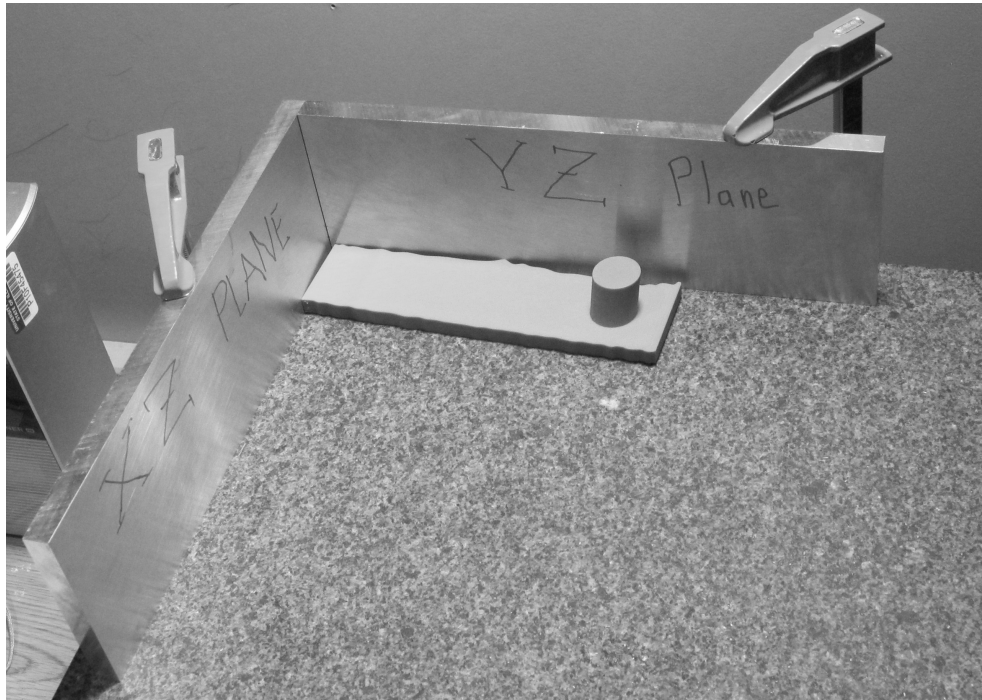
Fixturing Block 1 to inspect the true position tolerance.
